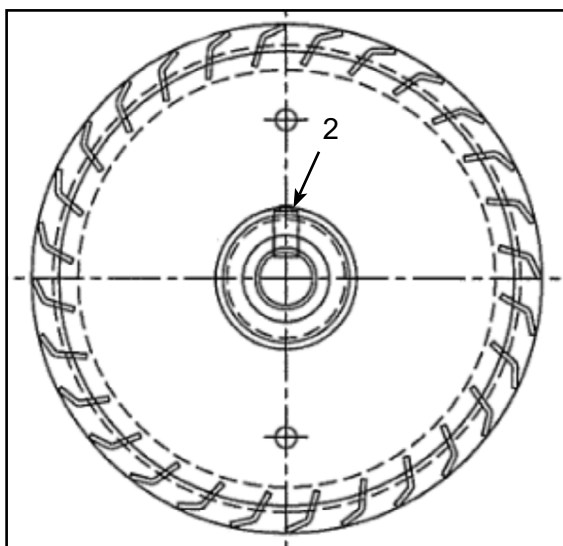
89D22-(), 90D39-() Blower Wheel
